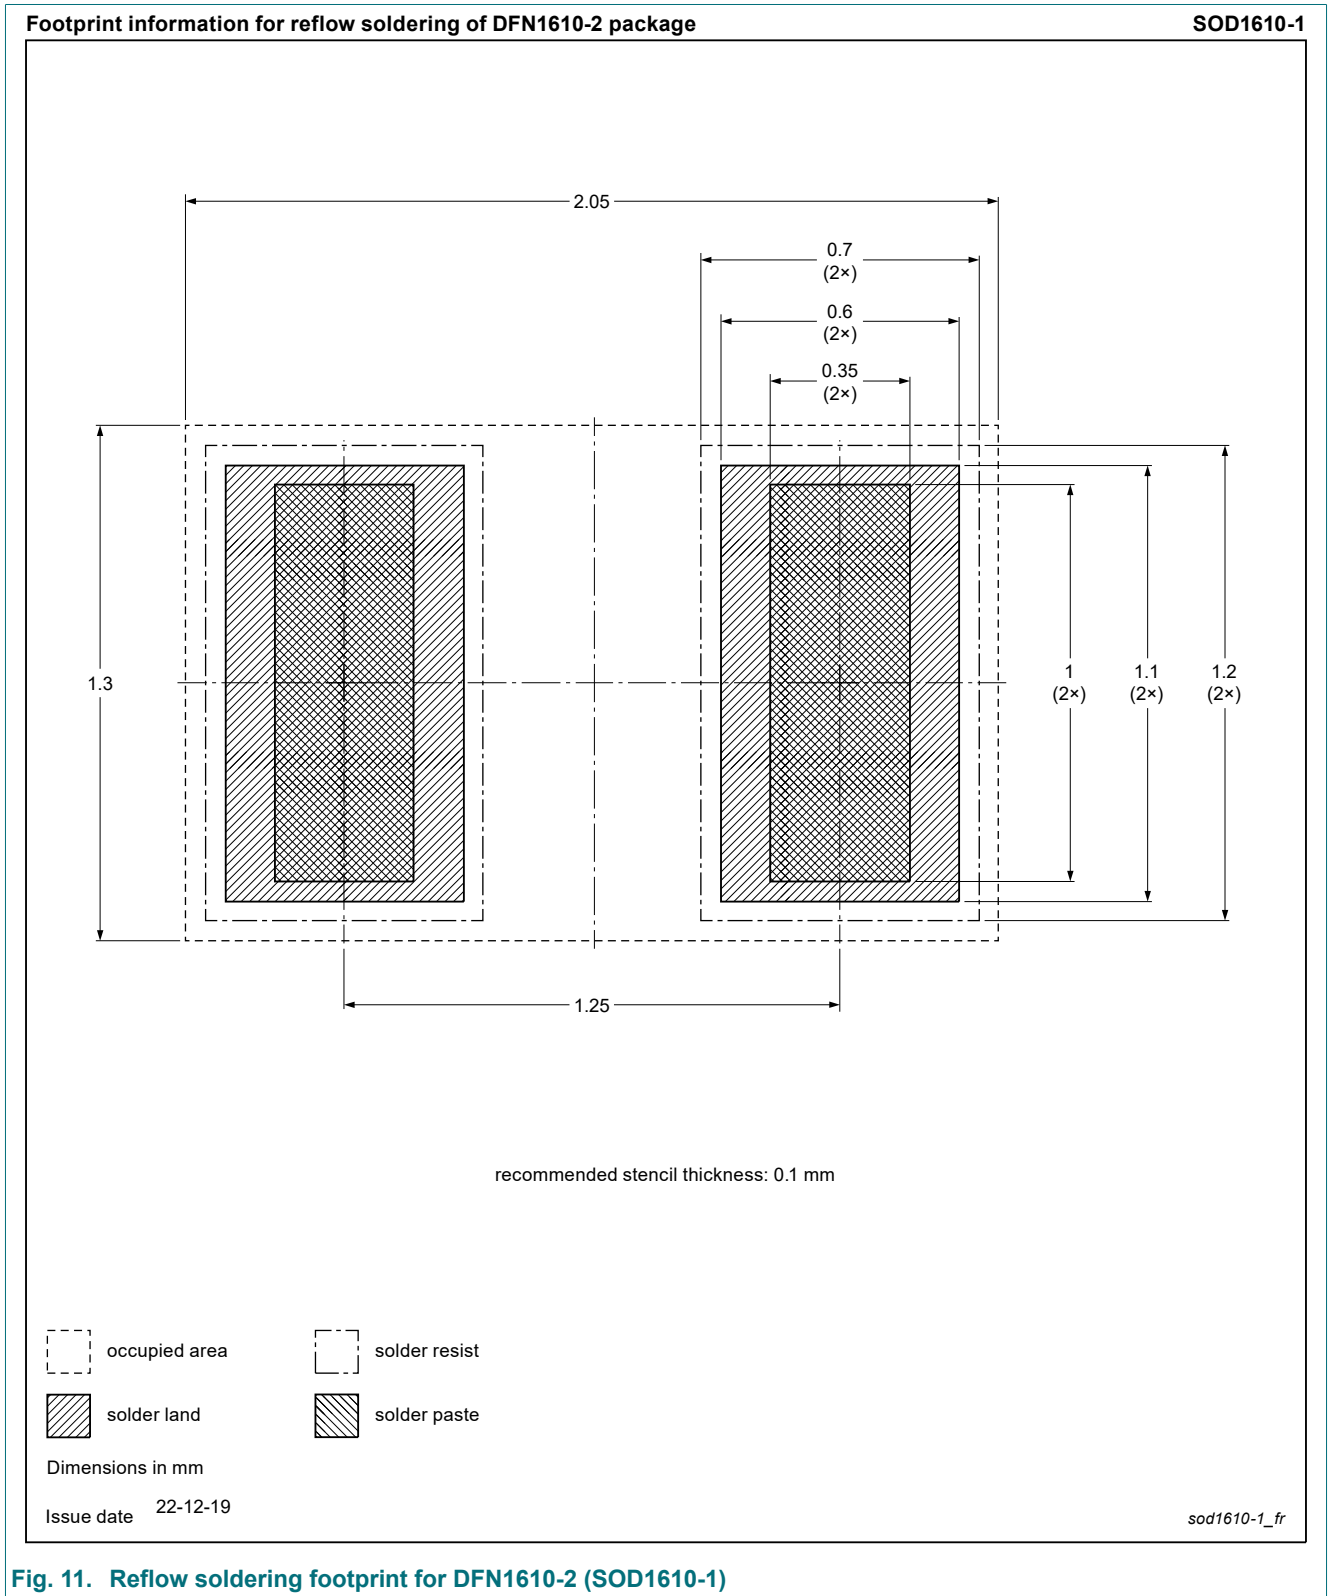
Reflow soldering footprint for DFN1610-2 (SOD1610-1)
